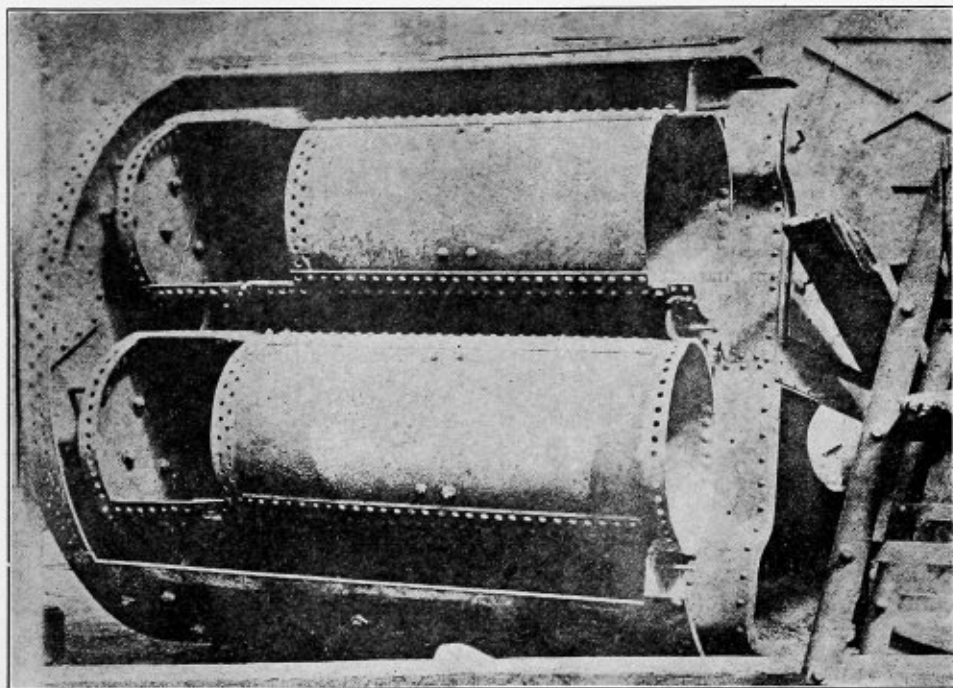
CORRODED BOILER WITH BOTTOM OF SHELL REMOVED, SHOWING PATCHES FITTED TO COMBUSTION CHAMBER.
